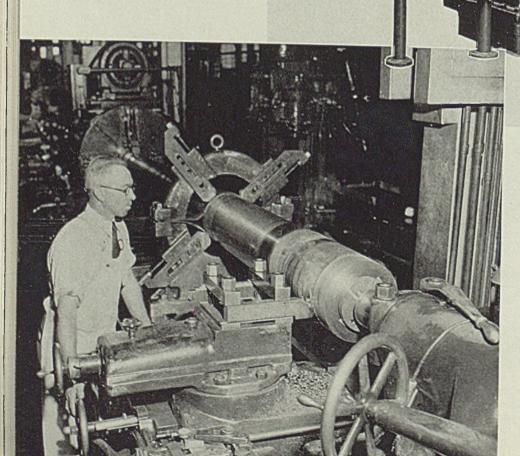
Special machine, above, for facing and boring large guns: Cross slides are provided at each end of machine so both ends of gun can be faced in this unit. Note extremely heavy mountings to support the weight of the work: Also grip in foreground and nearby control panels are part of mechanism employed to revolve the huge piece of steel. Part of breech boring tool also can be seen here
